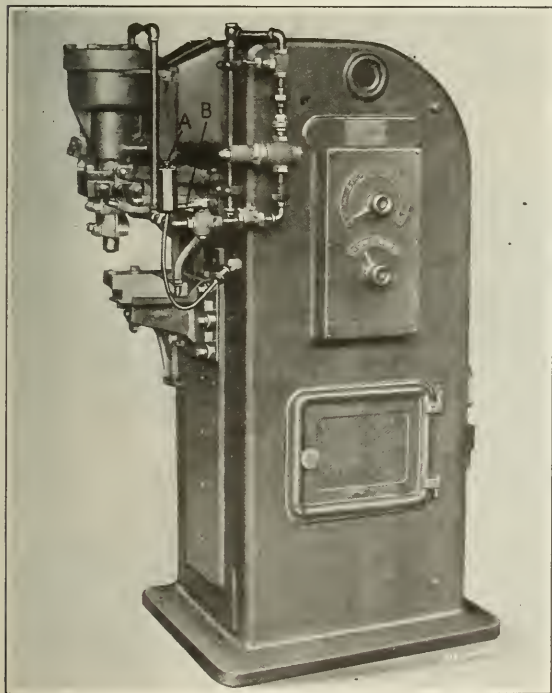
Special Toledo Electric Welding Machine fitted with Air Cylinder and Three-port Valve for operating Electrode and Steel Riveting Die—Steel Riveting Die not shown in Position
